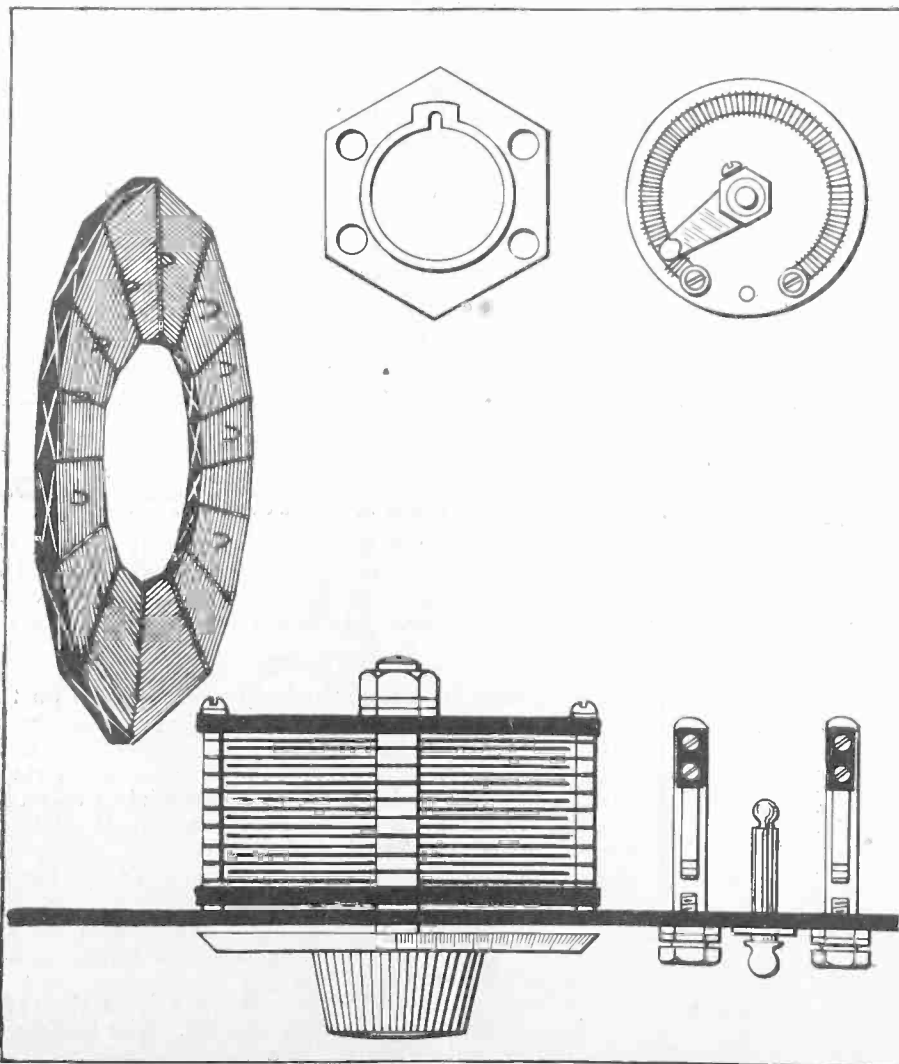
Assembly plan for 1-dial DX set, showing variable condenser with coil mounted thereon; rheostat, tube etc. This plan may be followed exactly, except that the switch would be on the
